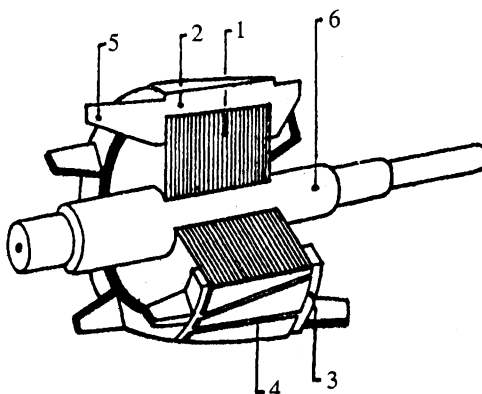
Squirrel-cage rotor. 1—lamination, 2—bar section, 3—end ring, 4—skewed bar, 5—built-in fan 6—shaft.
